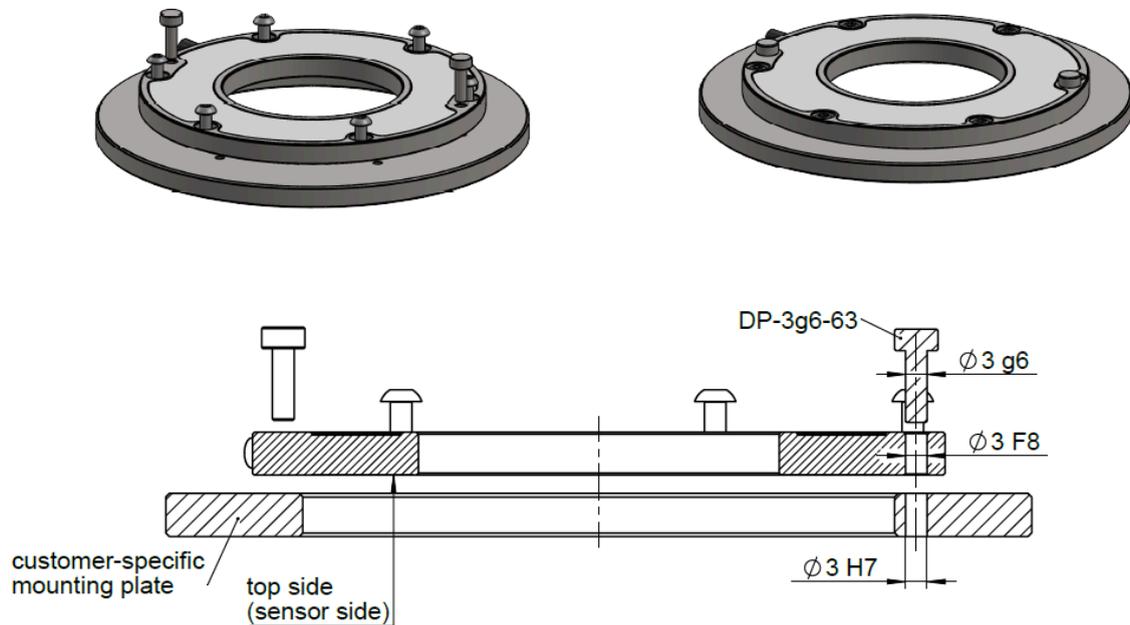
GMI Angle Stator GAS Dowel-Pin mounting
